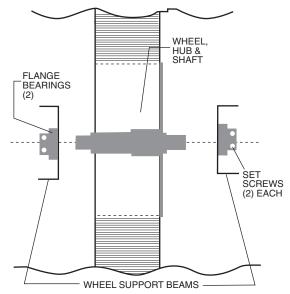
62M075,120 Energy Transfer Wheel Assembly
